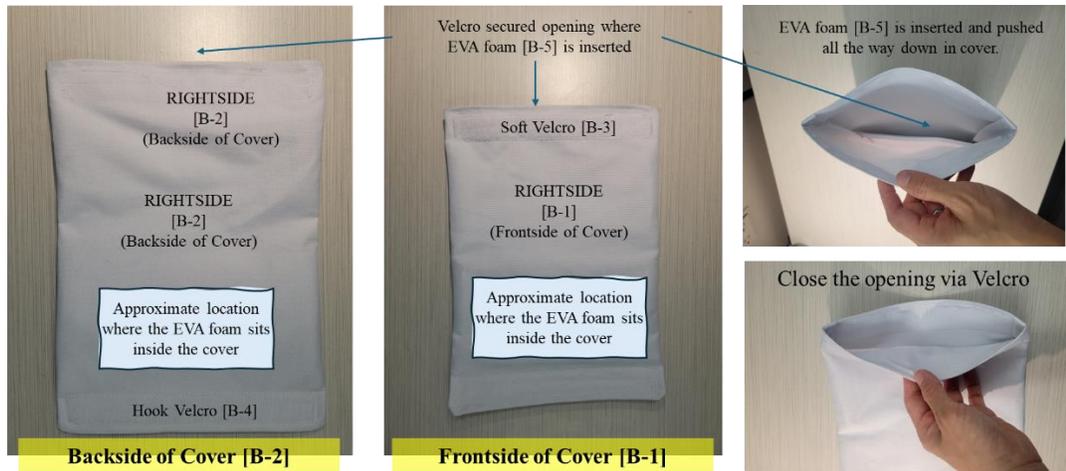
Completed Assembly of 1 Unit of HUT Arm Canvas Cover.
